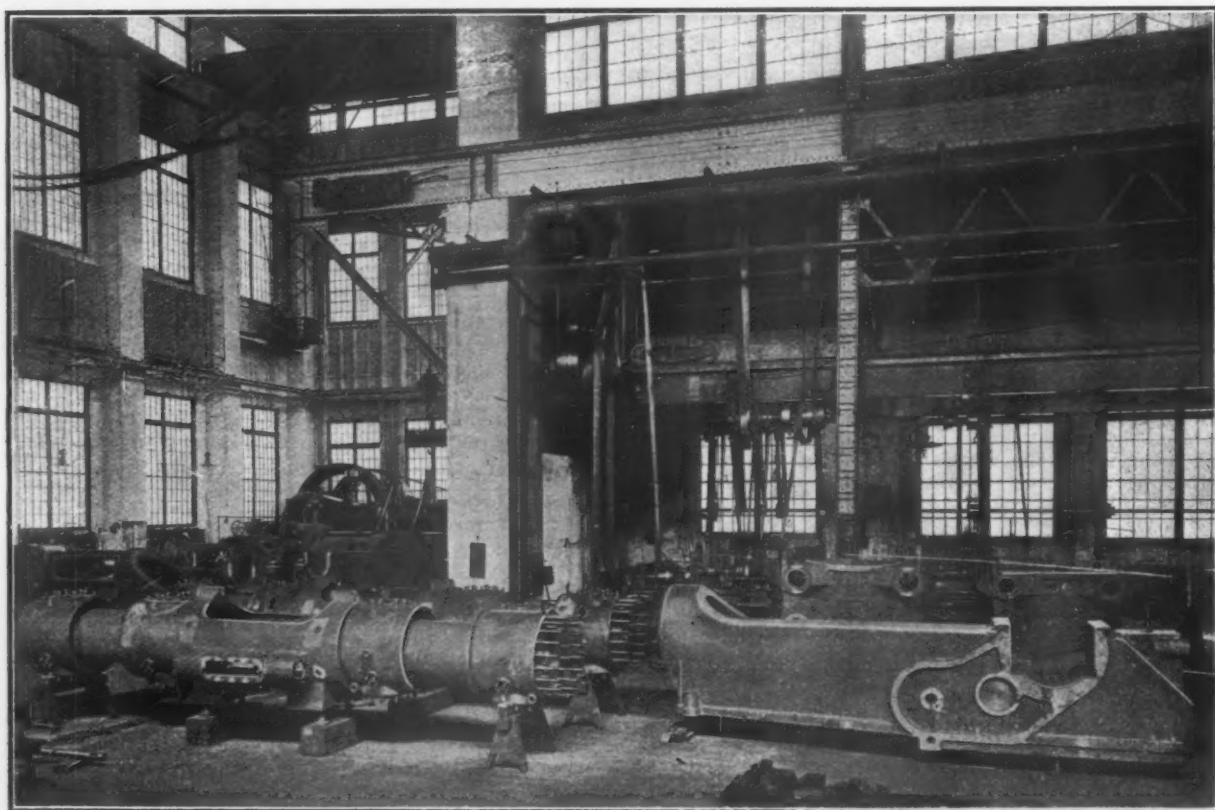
A View in the Erecting Shop, Showing the Unassembled Cylinders and Bed of a Large Gas Engine.
